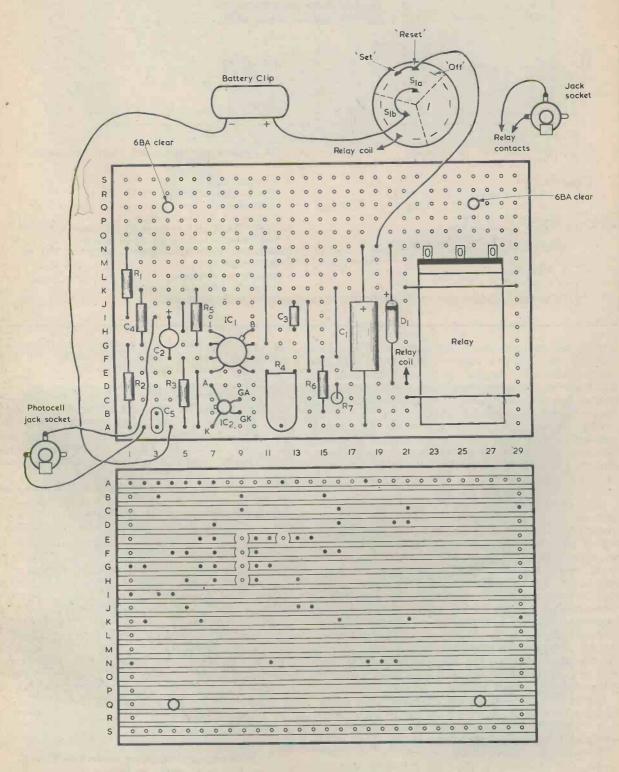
Details of the component assembly on the Vero stripboard. The relay is held in position by two tinned copper wires soldered to the strips at the points indicated
